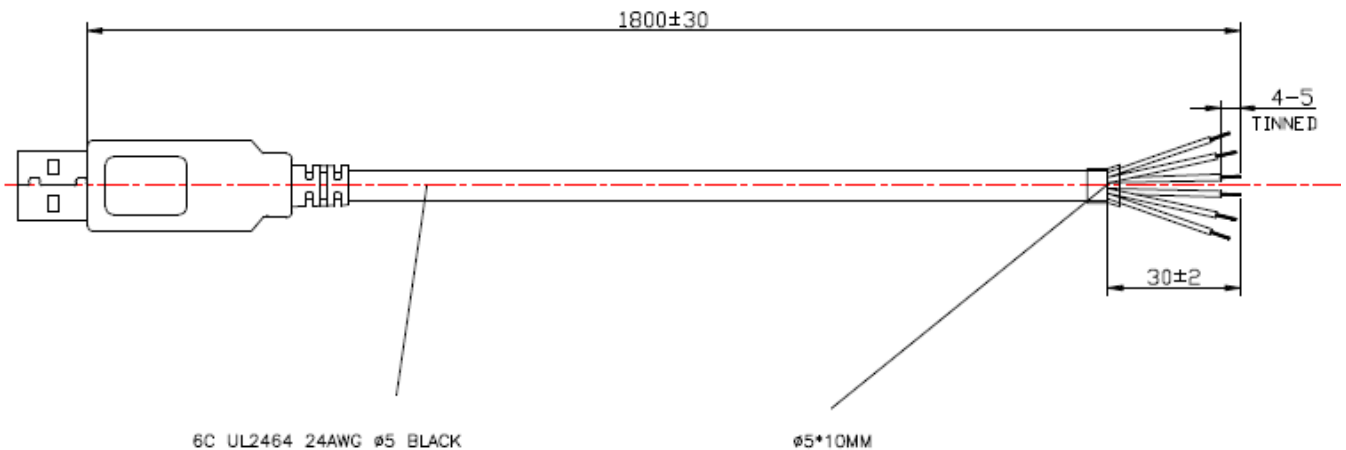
USB-RS232-WE-1800-BT-0.0 Mechanical Details (dimensions in mm)
